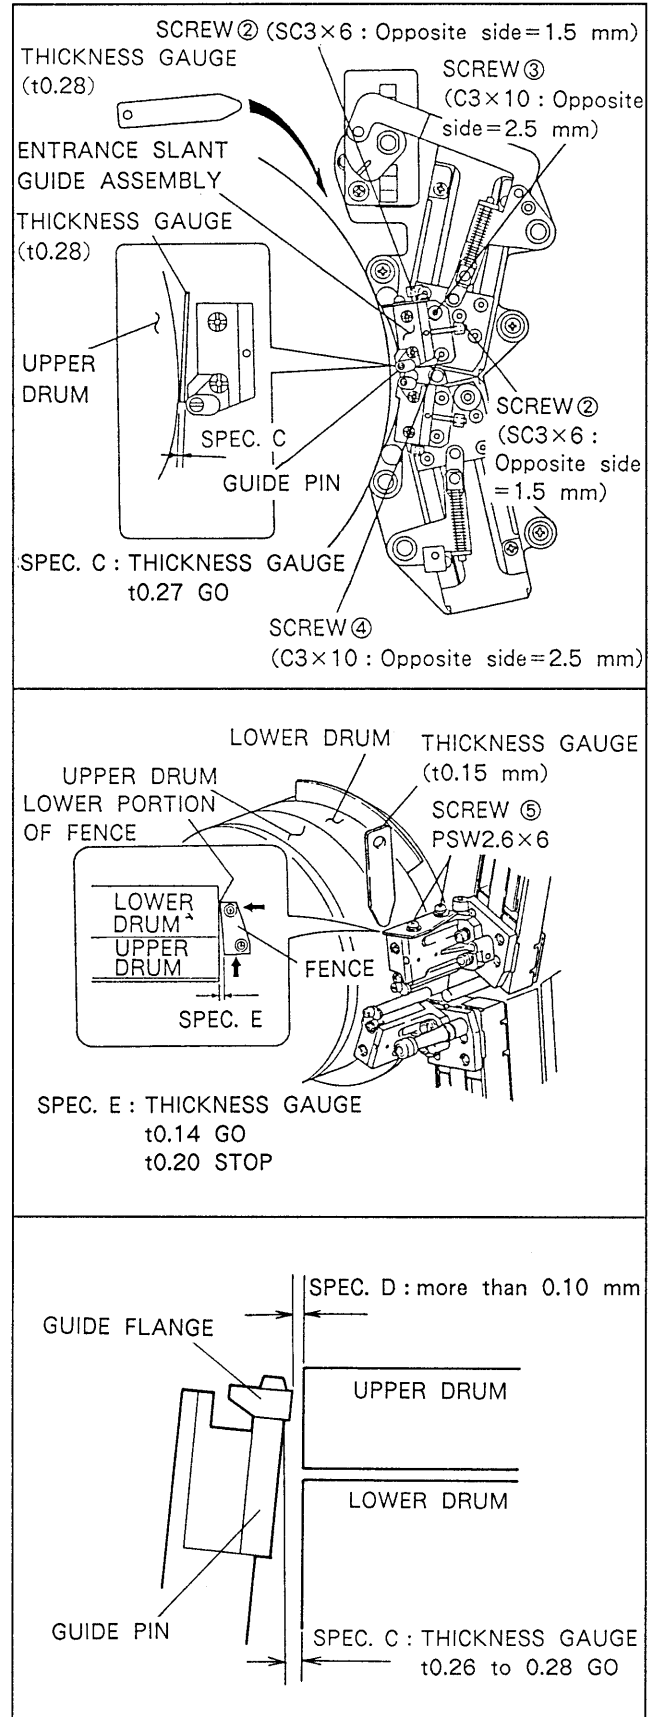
Entrance Side Guide Flange Clearance Adjustment
